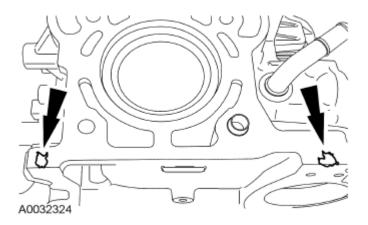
Locating Silicone Gasket And Sealant Apply Locations Courtesy of FORD MOTOR CO.
